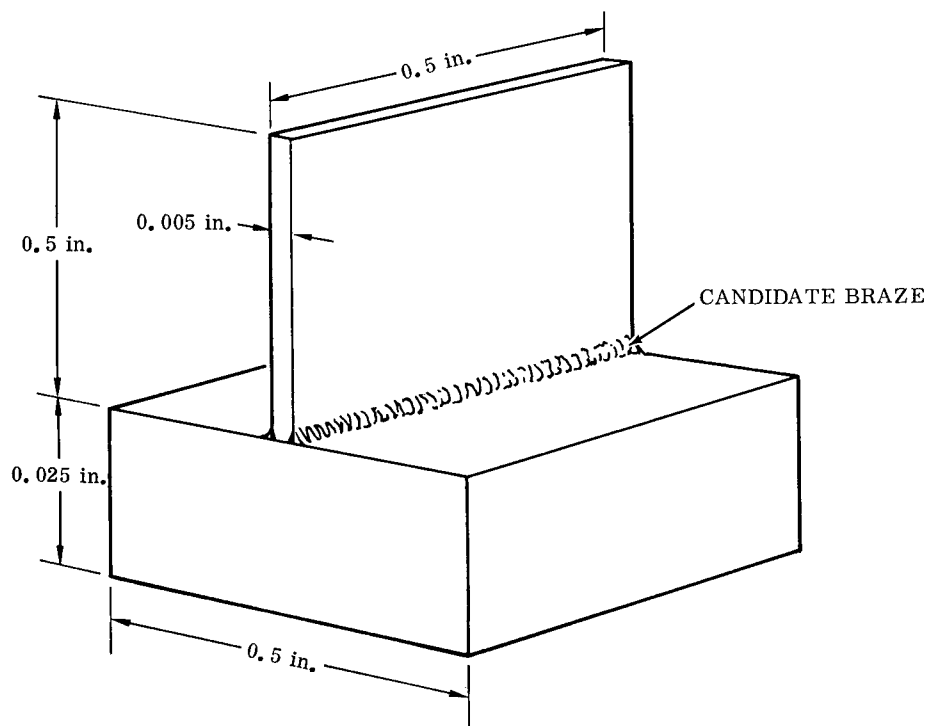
BRAZED Cb-1Zr T-JOINT SPECIMEN; Metallography and Bend Tests
